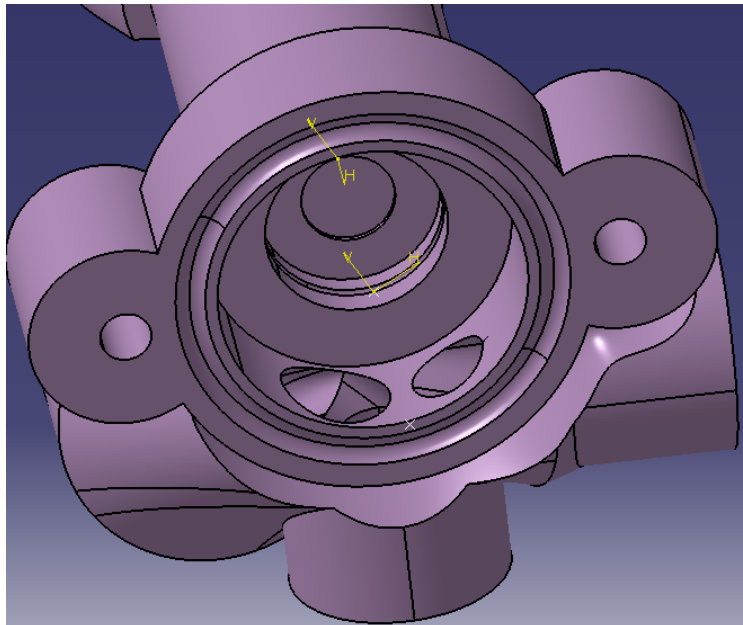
, CAD drawing of air drill without turbine (Grindley, 2014)
